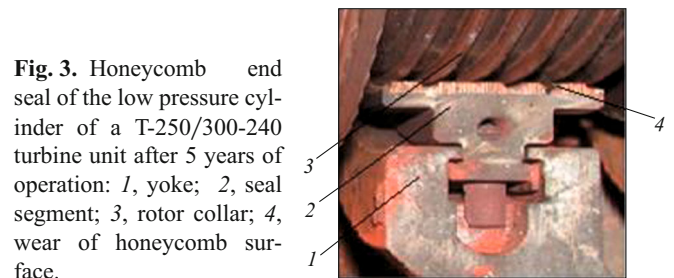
Honeycomb end seal of the low pressure cylinder of a T-250/300-240 turbine unit after 5 years of operation: 1, yoke; 2, seal segment; 3, rotor collar; 4, wear of honeycomb surface.
